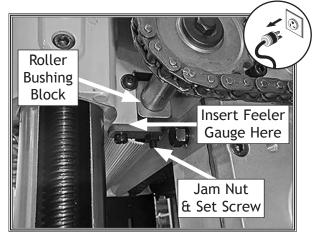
Example of feeler gauge location for adjusting infeed roller height when using wood blocks (one of two locations shown).
